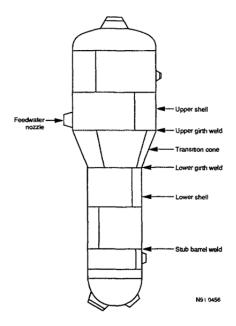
PWR steam generator showing shell welds [10]. Copyright Westinghouse Electric; reprinted with permission.
